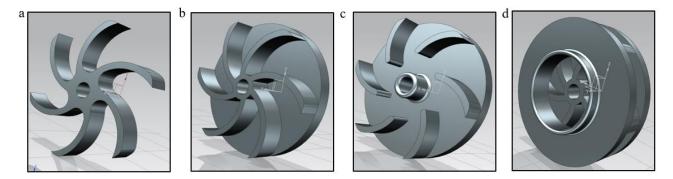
(a) Open impeller (b) Semi-open impeller (c) Modified Semi-open impeller (d) Closed impeller.
